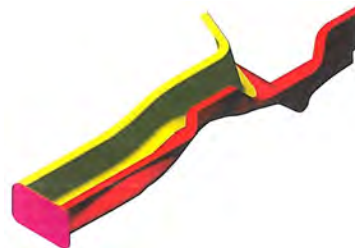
50.1 2111-3 Rear frame rail assembly (RH)
